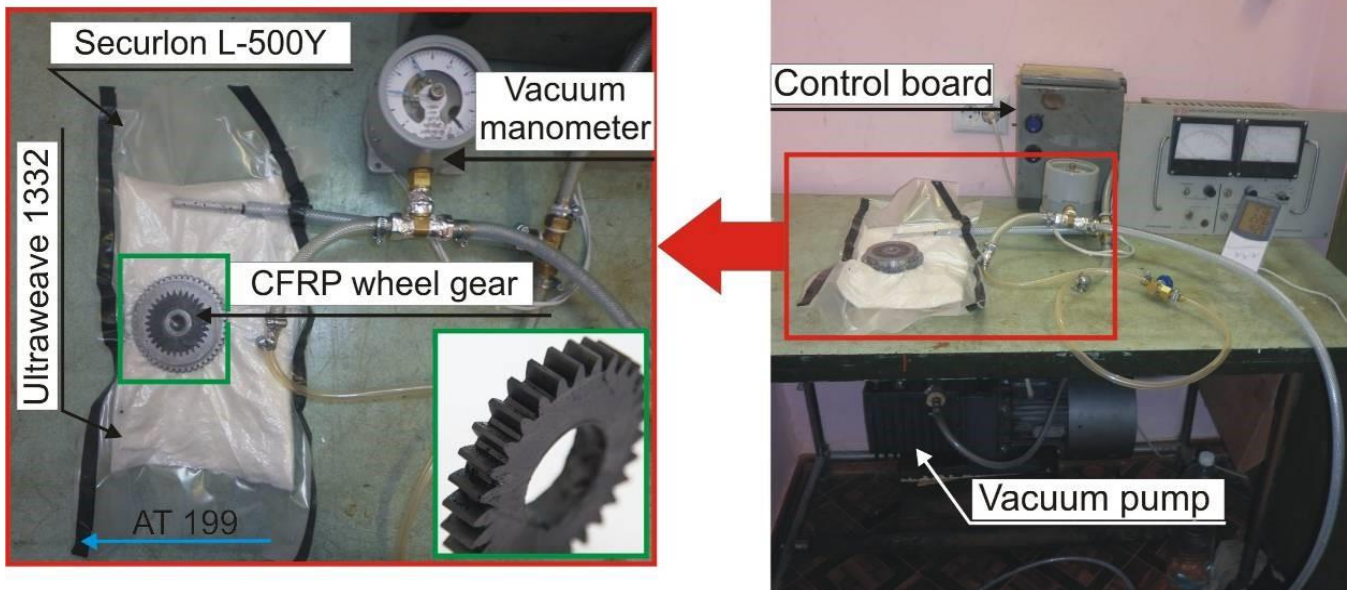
Scheme of CFRP wheel gear vacuum formation
